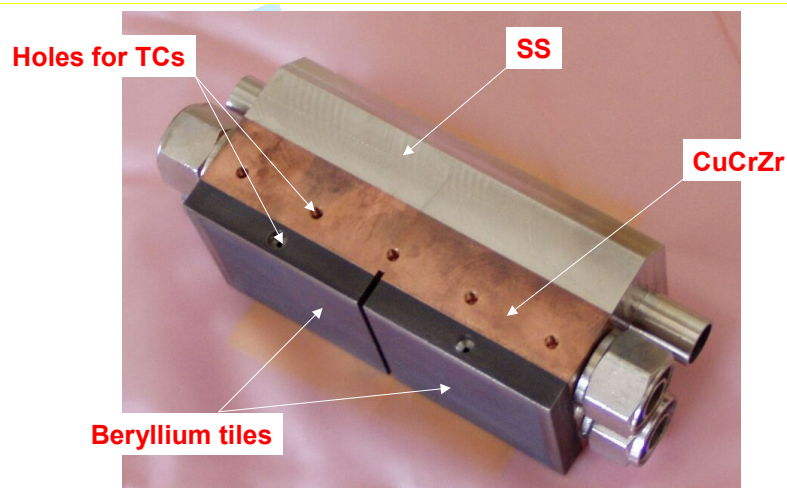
Primary First Wall Mock-up specimen to be tested in-pile
